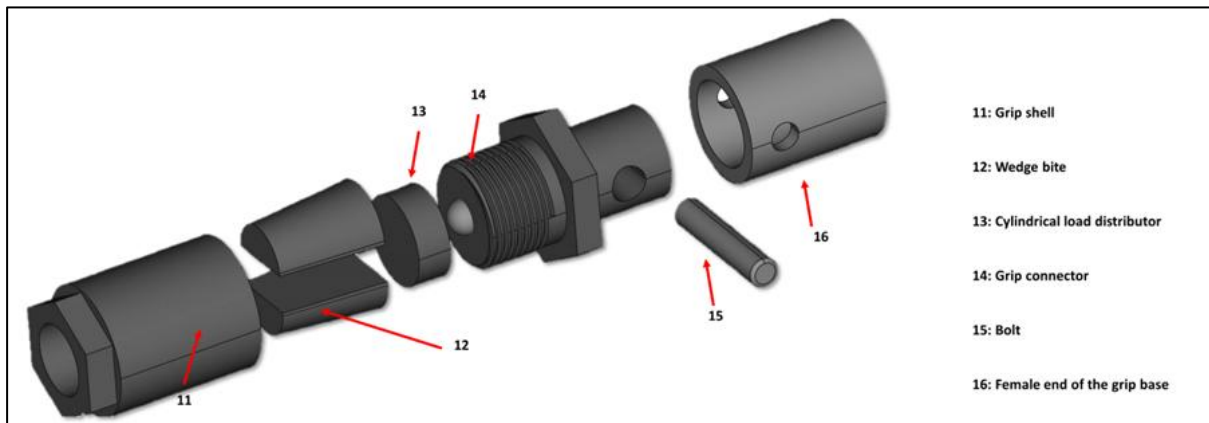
Schematic demonstration of the optimized grip section and its thread-to-clevis connector and pin.
